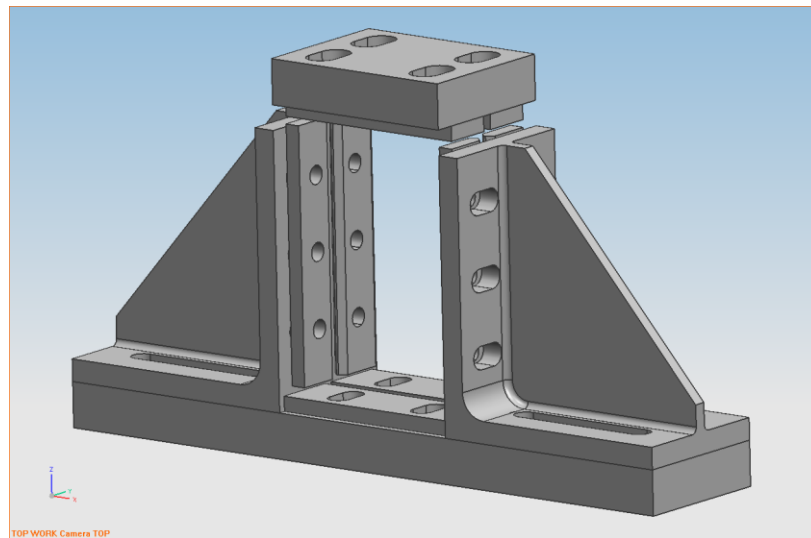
V-Notched Rail Shear Fixture Assembled
